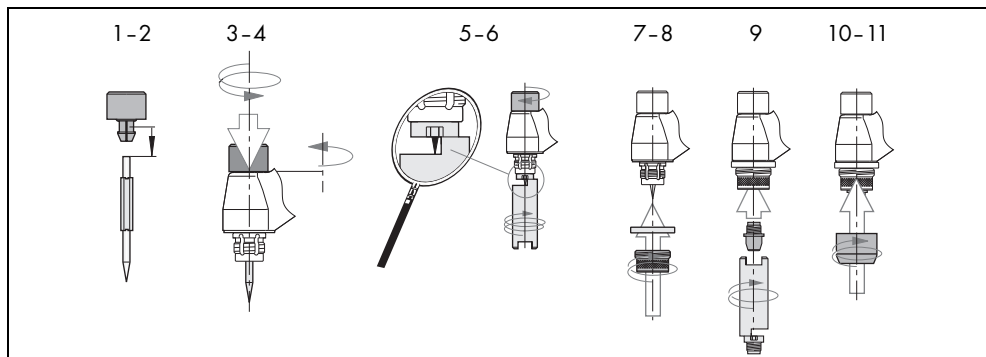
Steps for setting up the ABIPLAS® WELD 150 CT20 torch body
